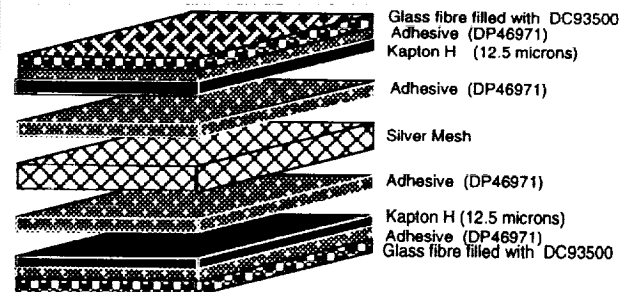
Exploded view of the 0.21 mm - thick, flexible carrier substrate of the SPA, including 50 micron-thick silver mesh for power transfer
